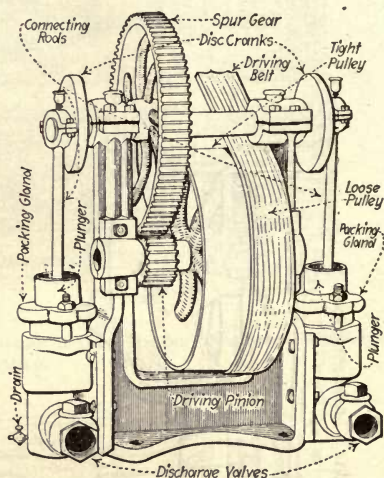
Belt Driven Single-Acting Plunger Pump For Boiler Feeding.
